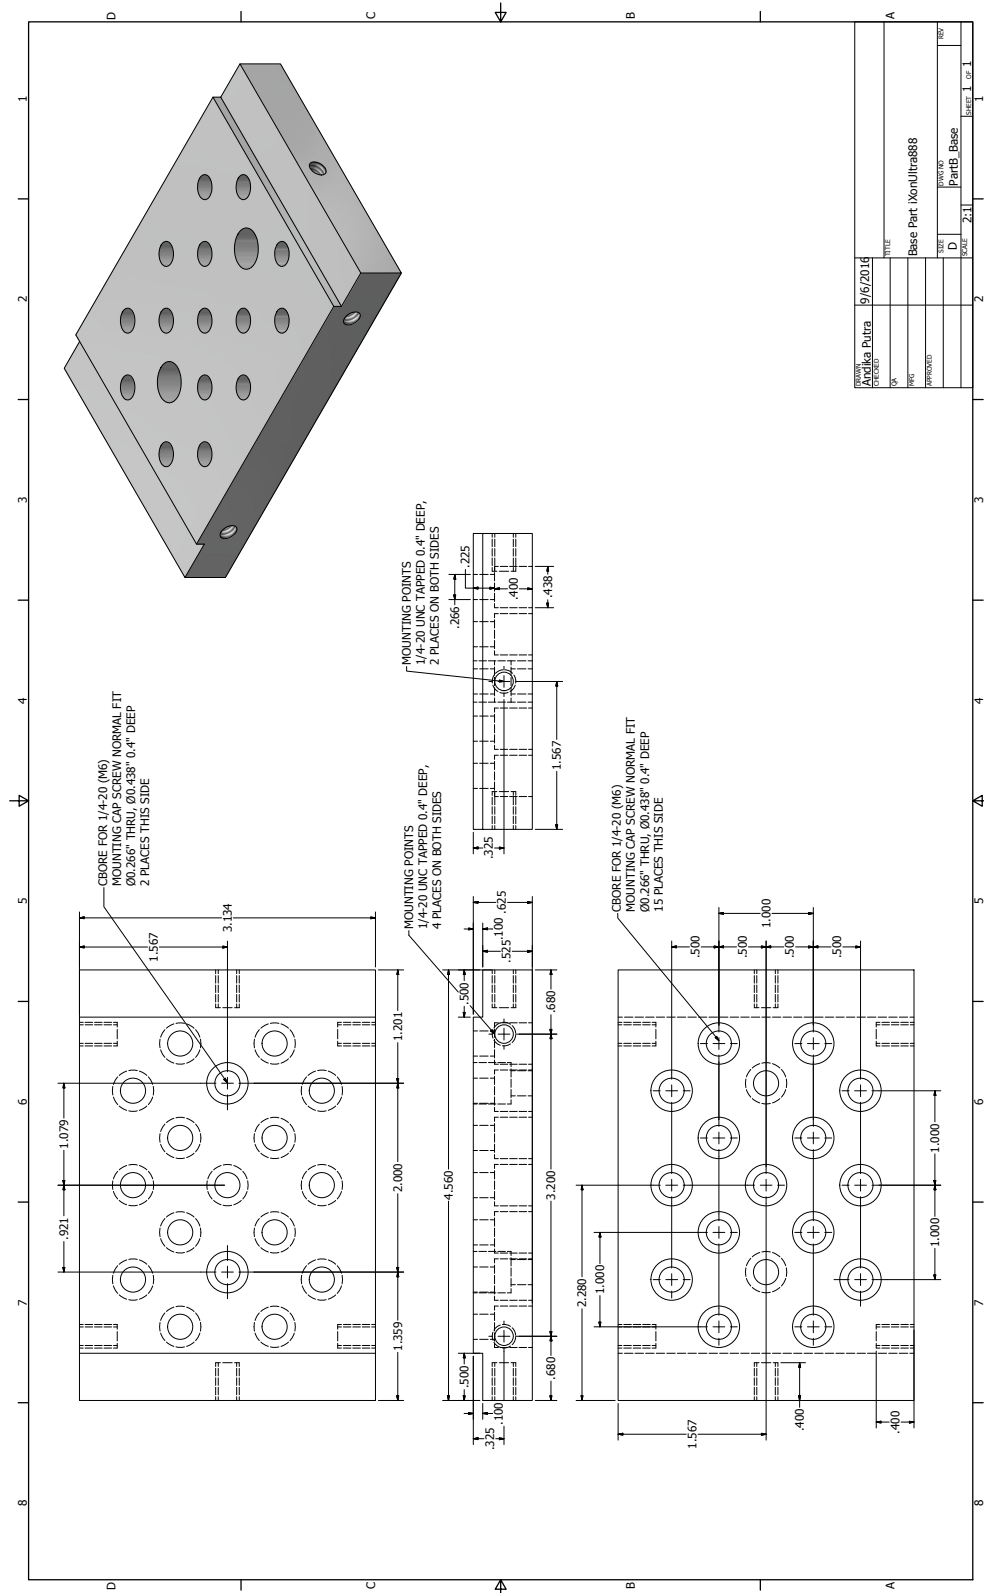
Machine drawing (not to scale) of the base mounting plate for iXon Ultra 888.
